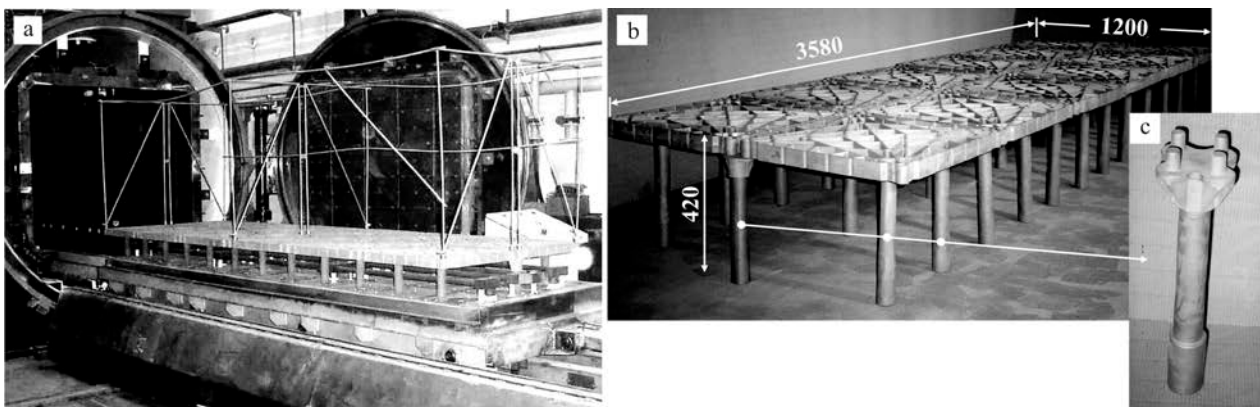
Vacuum bogie hearth furnace for annealing of metal powders [3, 9]: a) general view; construction welded from steel rods set on a stem indicates the space occupied by the containers in which the charge is placed, b) the core made from pallets and racks set on the furnace hearth
